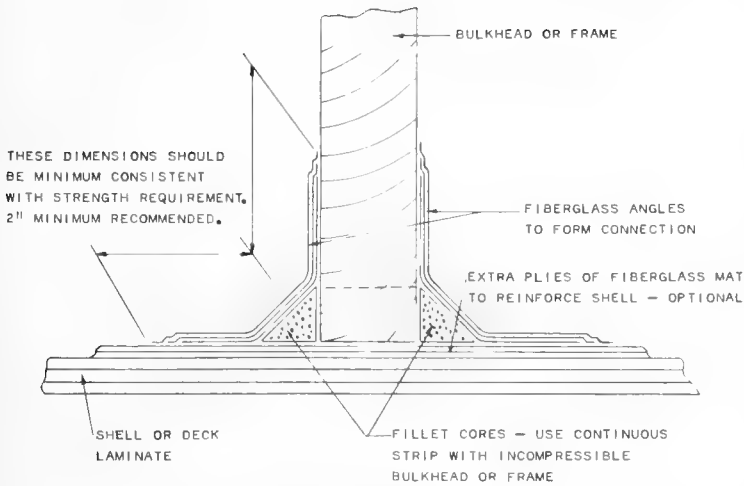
Connection - Bulkheads and Framing to Shell or Deck
